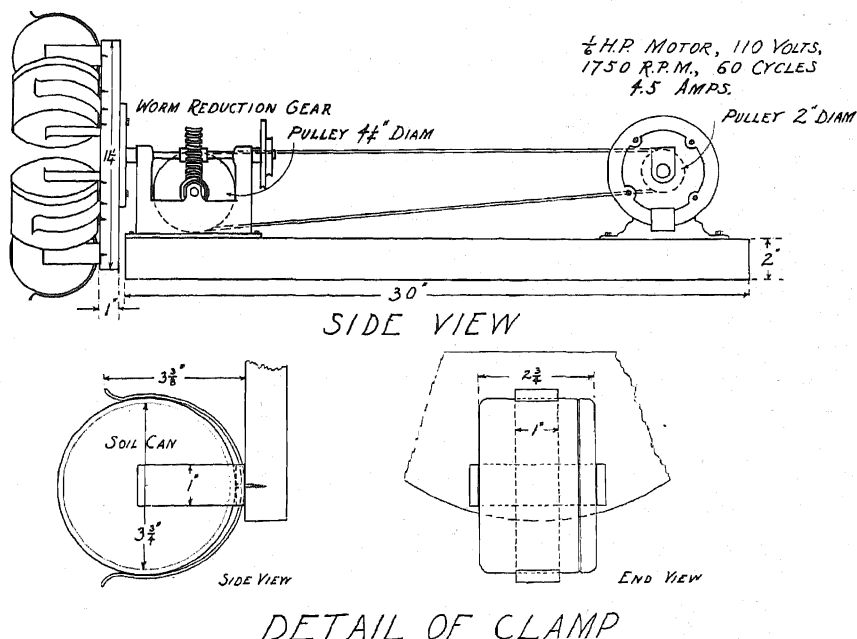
Drawing showing dusting machine for treating small samples of grain.
